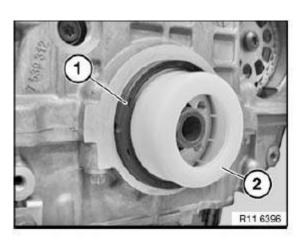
Identifying Radial Shaft Seal & Support Bushing Courtesy of BMW OF NORTH AMERICA, INC.
